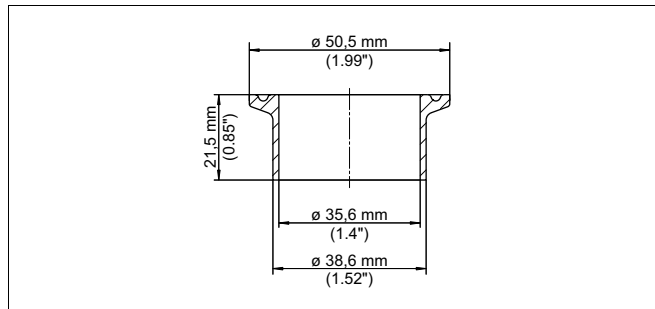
Dimensions welded socket Clamp 1½" PN16 DIN 32676, ISO 2852/316L
